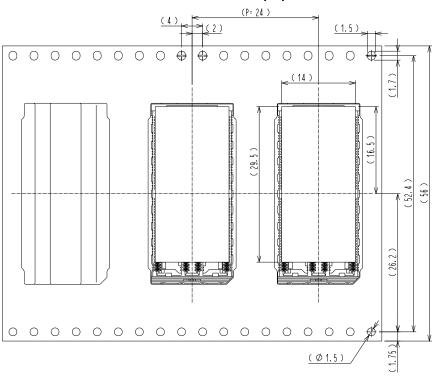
Embossed Carrier Tape for IT9 Receptacle (dimensions in mm)
